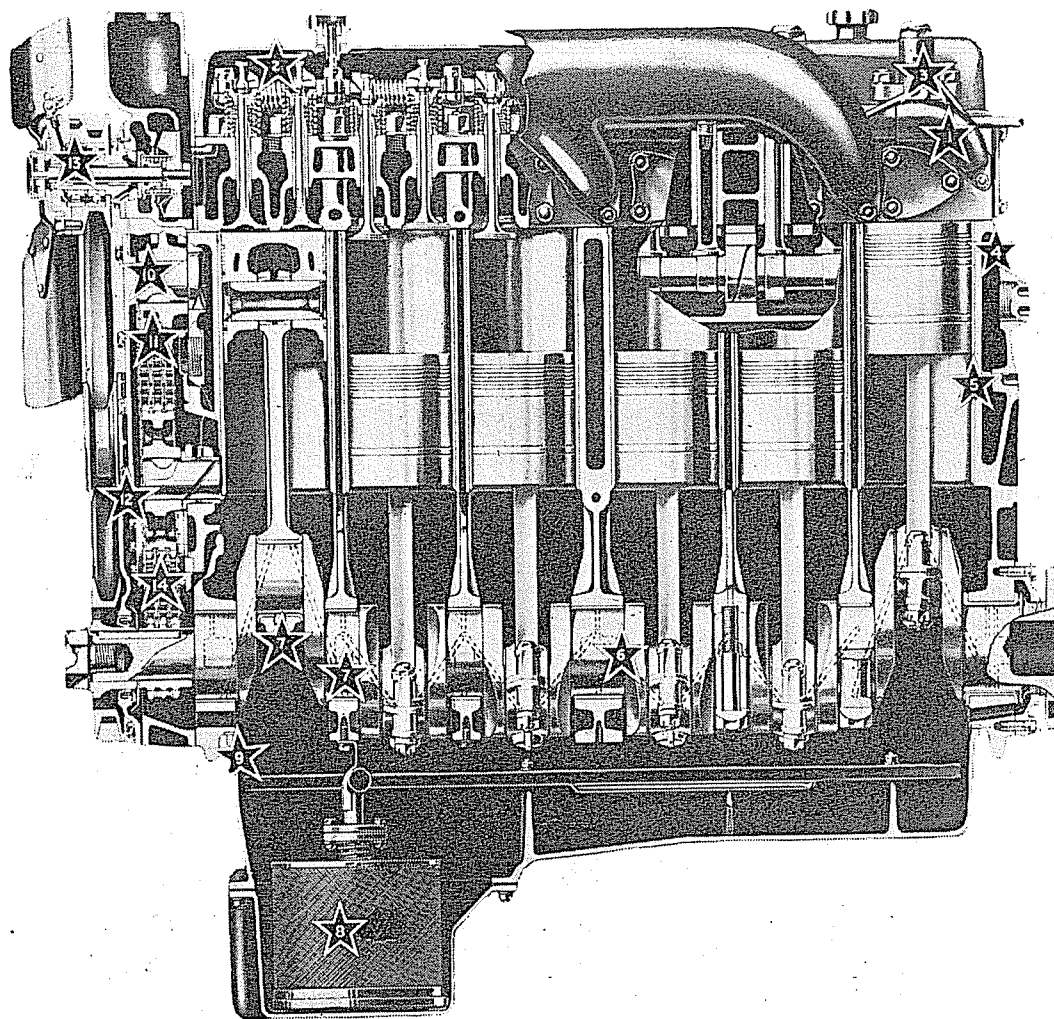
LONGITUDINAL SECTION OF DIESEL ENGINE.
